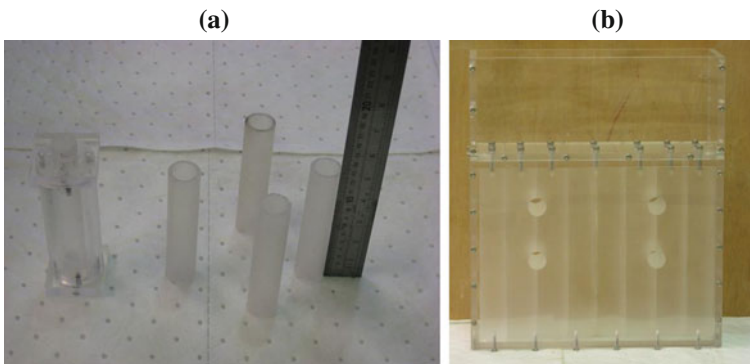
Moulds for manufacturing a inner tube of rubber bag; b outer rubber bag
